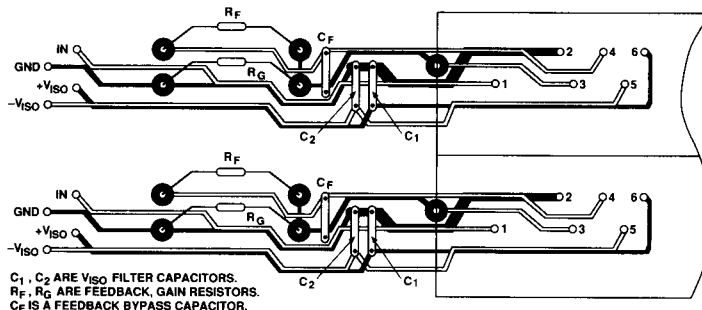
PCB Layout for Multichannel with Gain Is Required on the AD206s
